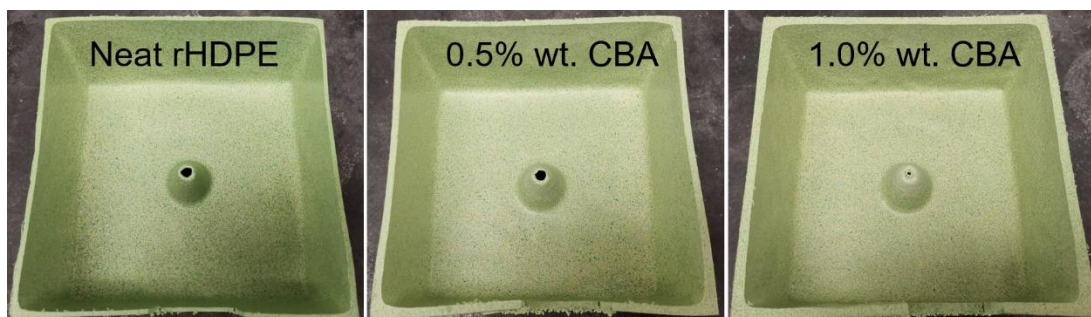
Typical examples of the rotomolded rHDPE parts (cut samples).
